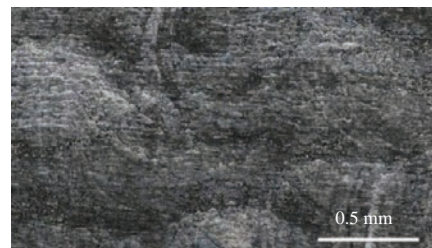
Workpiece surface after forming with T2 dry ($v_f = 500$ mm/min).
